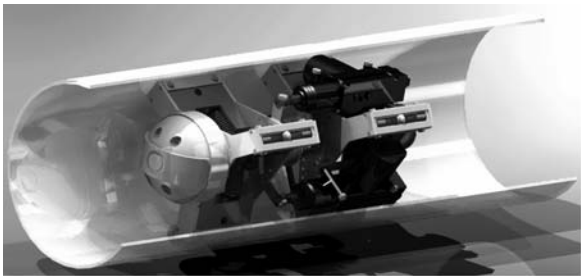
A 3D CAD model of robot with two masses and electrical drives inside a pipe
